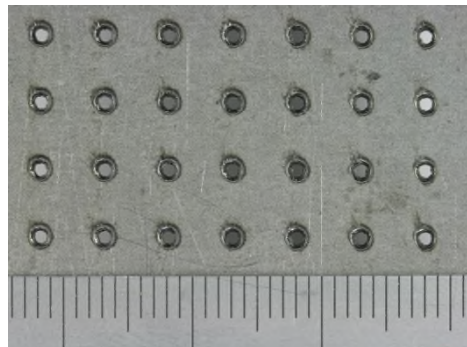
Series of pulsed laser drilled holes in 0.8 mm thick steel sheet
